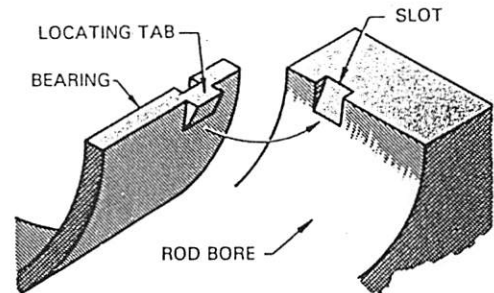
Connecting rod precision insert is aligned and held in place by bearing locating tab engaging a slot in rod bore. (Clevite)
